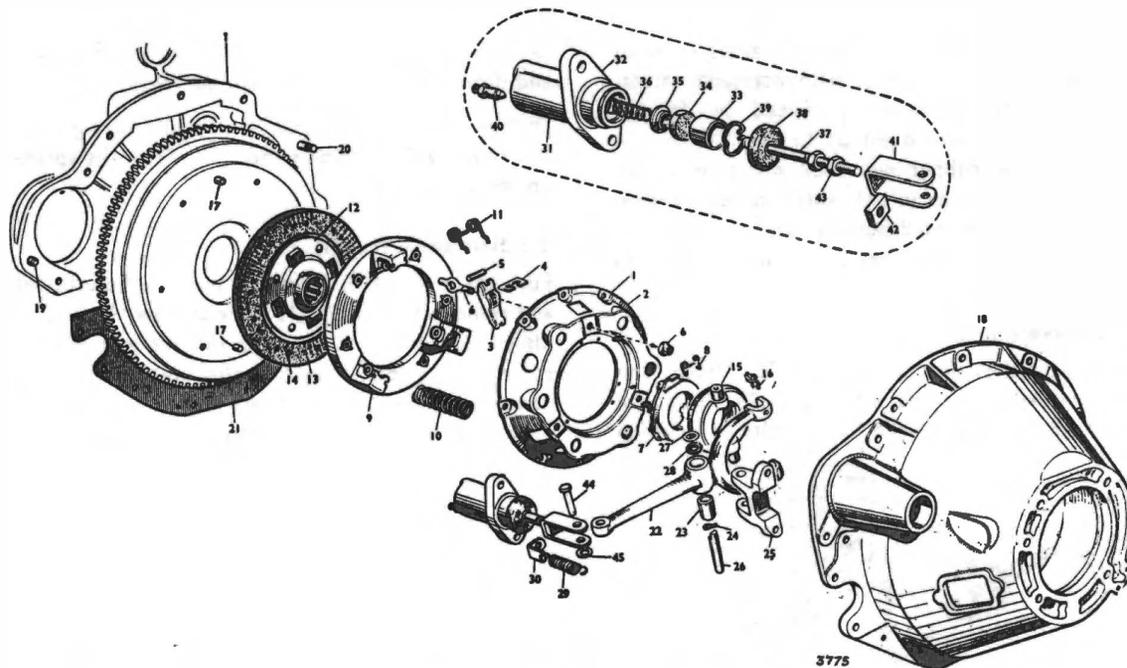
Exploded view—Clutch components and slave cylinder (Alpine Series I, II and Rapier Series III cars)
